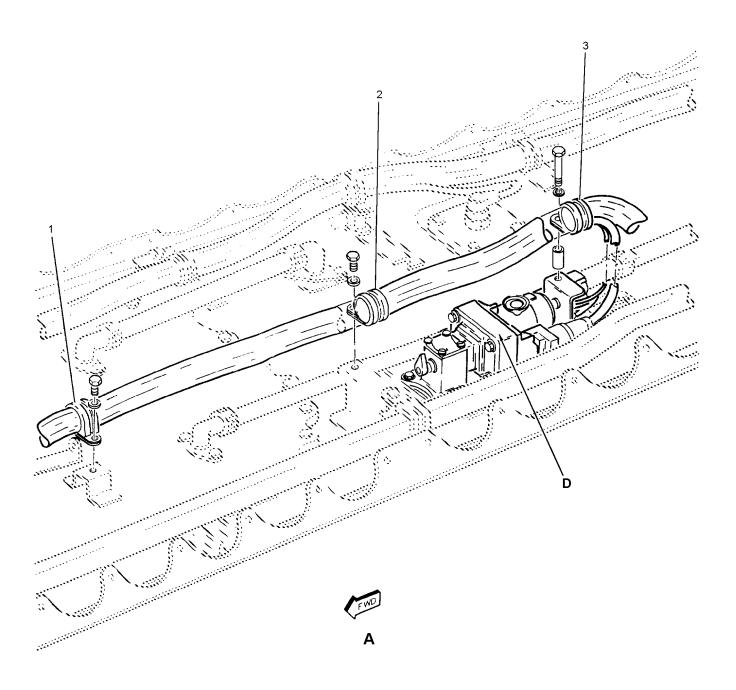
Fuel Dump Valve (5B-P069) (Sheet 2)
